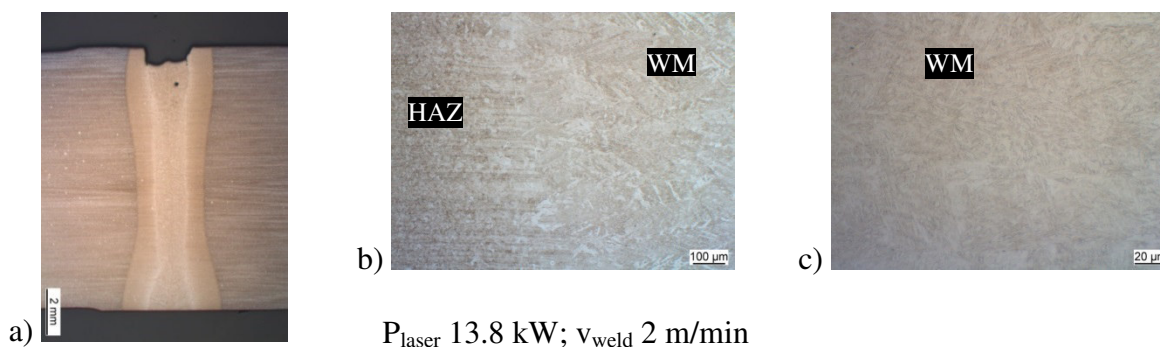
Autogenous laser weld (a), varying magnifications of the same weld with focus on the fusion boundary (b) and weld metal (c)
